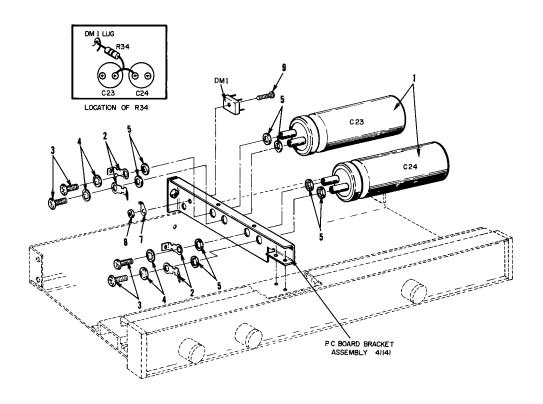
EXPLODED VIEW DIAGRAM, CAPACITOR BRACKET ASSY., 41142
